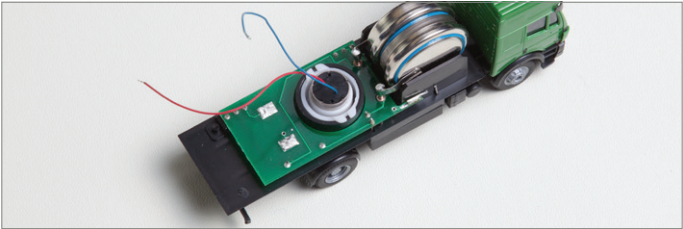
Lorry model with universal PCB, soldered batteries, without wiring
